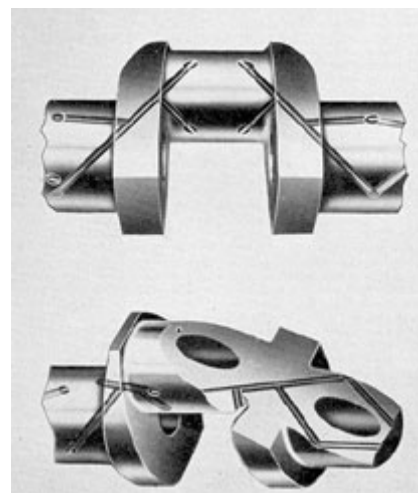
Sections of crankshaft showing oil passages and hollow construction.
